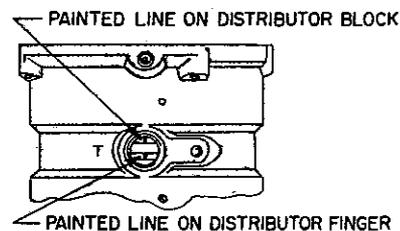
Painted Line on Distributor Finger and Block Viewed in Hole "T"
